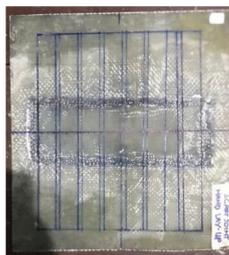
Scarf Method Hand Lay-Up Composite Repaired Panel
